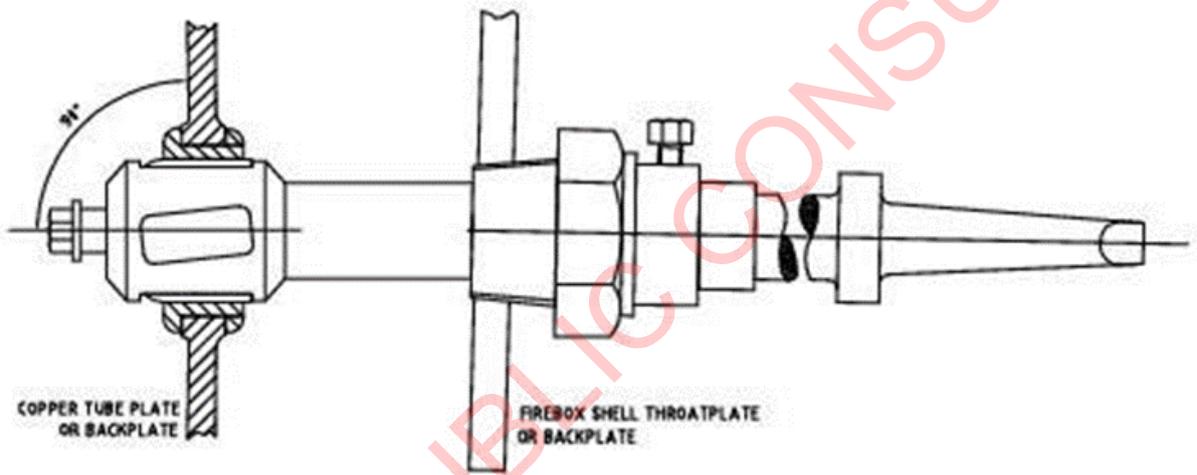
Expanding arch tubes in firebox plates with roller tube expanders
